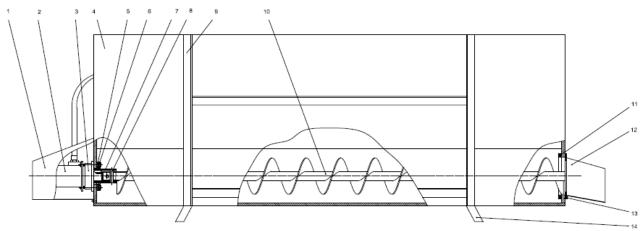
Drawing in 2D CAD of the concrete mixing bucket for skid loader (rear view):
